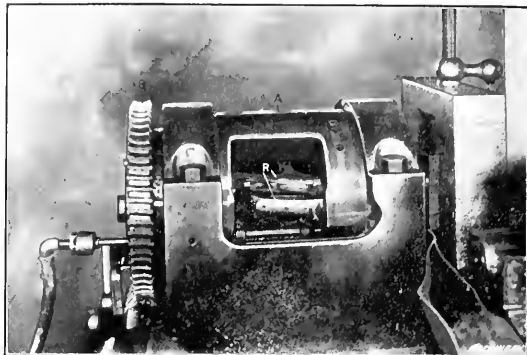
Special Attachment on Lincoln Milling Machines used for finishing Cartridge Chamber of Receiver
